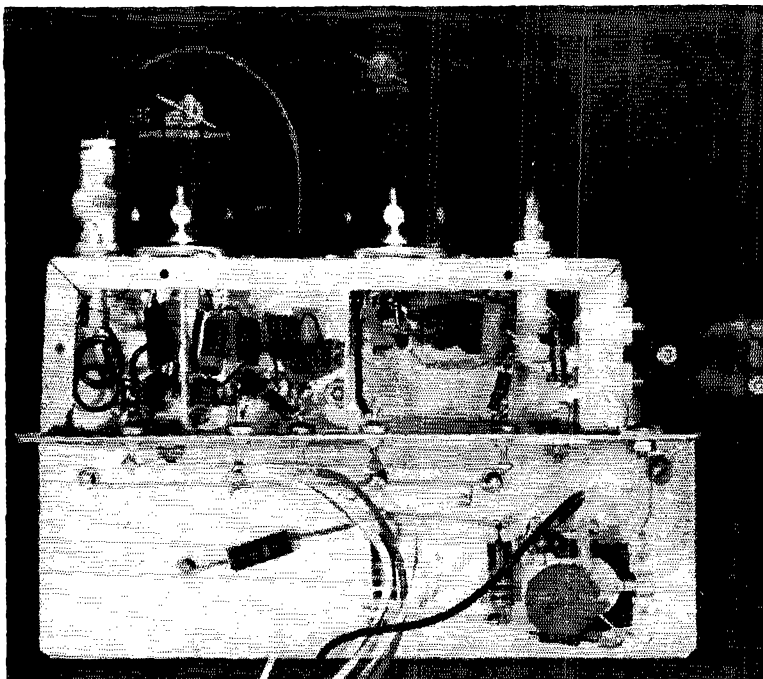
Rear view of the assembly with side plate of oscillator chassis removed.
